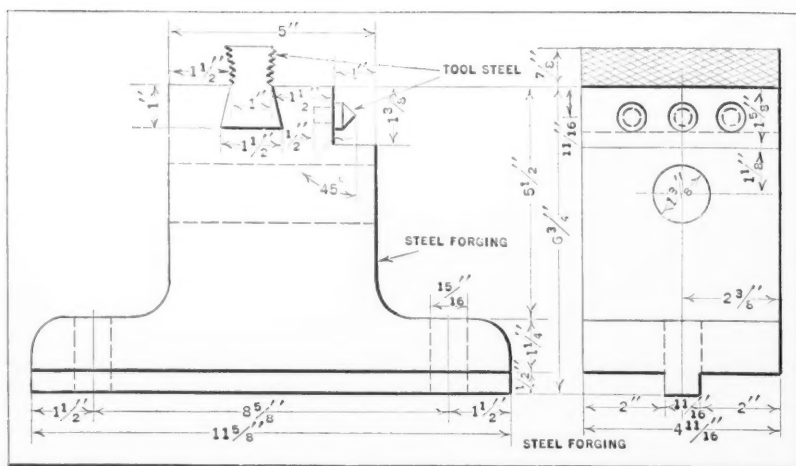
Details of One of the Work-holding Fixtures D, Fig. 1
